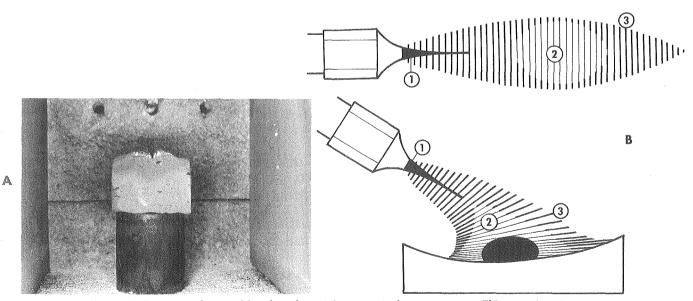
A, Invested assembly placed on inlay ring in burn-out oven. This permits air to circulate freely around the case and heat it uniformly. B, Use hottest part of reducing area of flame, close to inner, light blue center cone.
